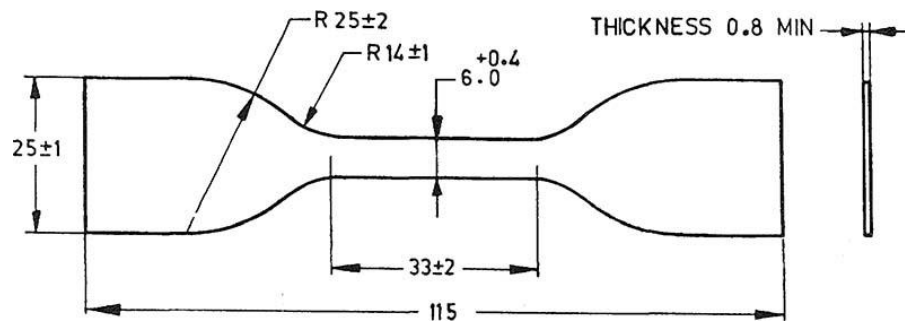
ASTMD 412-Type C rubber specimen dimensions
